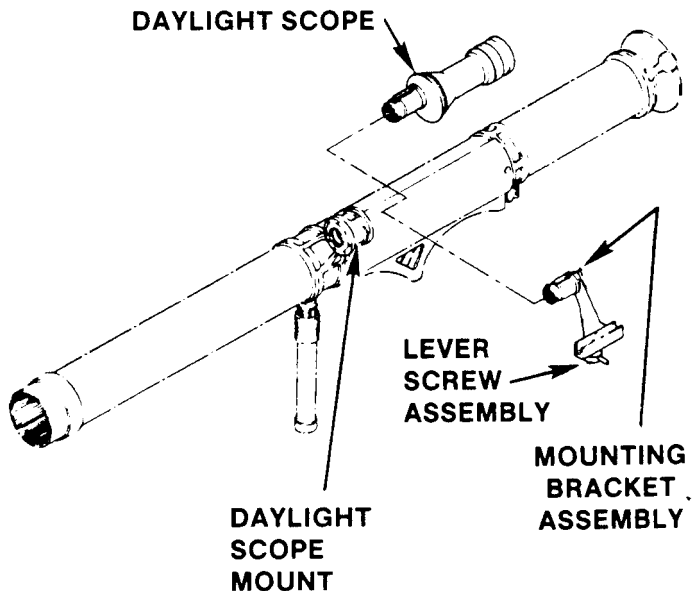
Installation of Mounting Bracket Assembly, M67.
